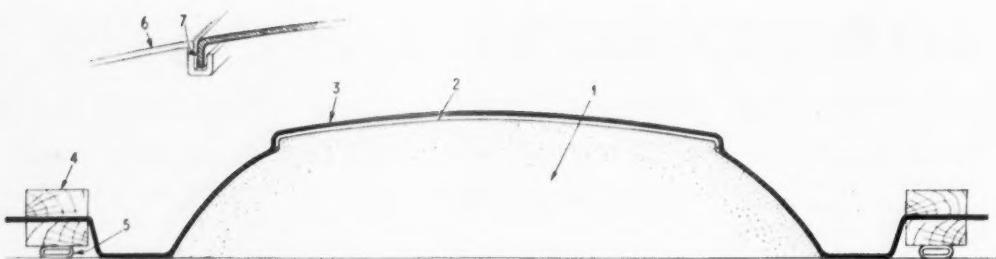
Semi-diagrammatic view through a male-type vacuum-mould showing one method of moulding an engine access panel. Detail shows the method of moulding drip-edging
